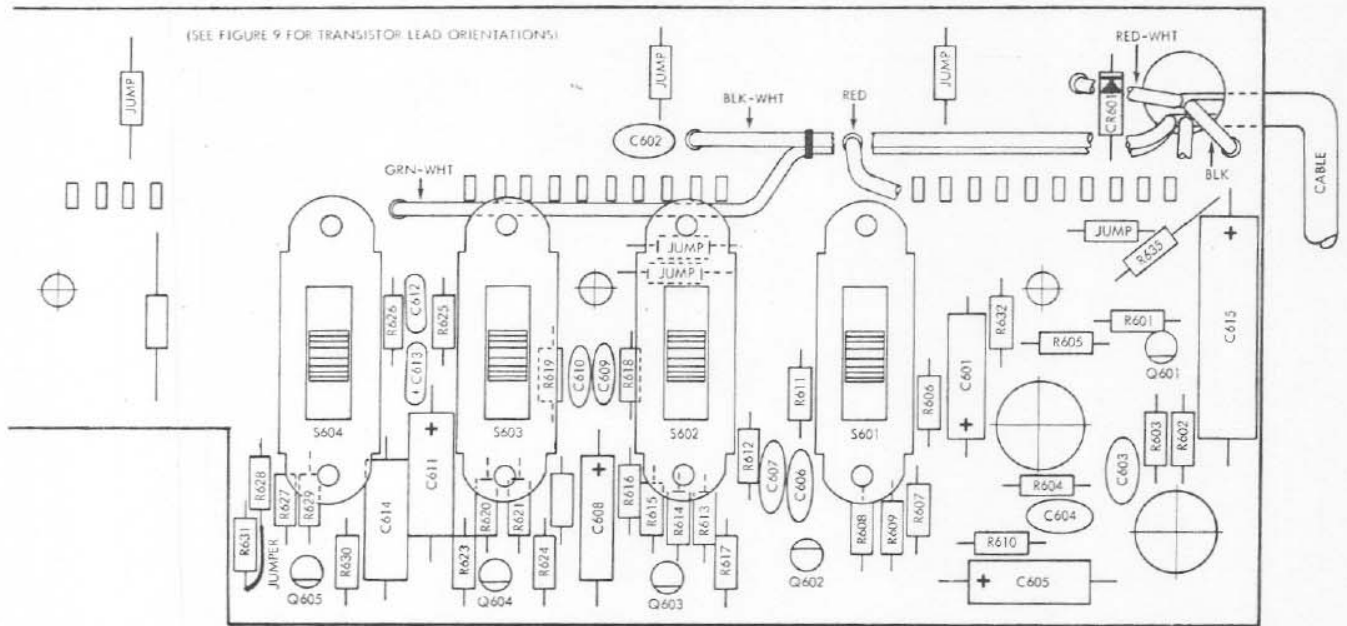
Electronic Part Locations (3D025-2), Fanning Strip PCB Assembly
